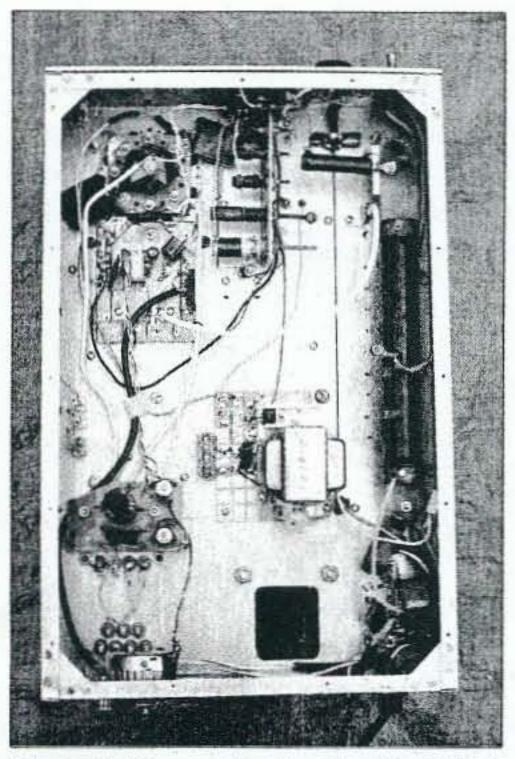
Photo B. The mechanism for the LOAD TUNE knob is near the front panel. Part of the knob can be seen alongside the toggle switch handle in this photo. The mechanism includes a small bracket made of sheet copper soldered to a 1/4-20 nut. The bracket bears against the chassis to prevent rotation of the nut. It also has a small hole drilled in it for attaching the dial cord. A washer has been fastened to the threaded end of the decapitated LOAD TUNE bolt and the PLATE TUNE bolt to act as a stop to prevent completely unscrewing the nut. I drilled and tapped the ends to accommodate a small screw for this purpose. R3 is mounted on the back end of the chassis for ease in adjusting control-grid bias.
